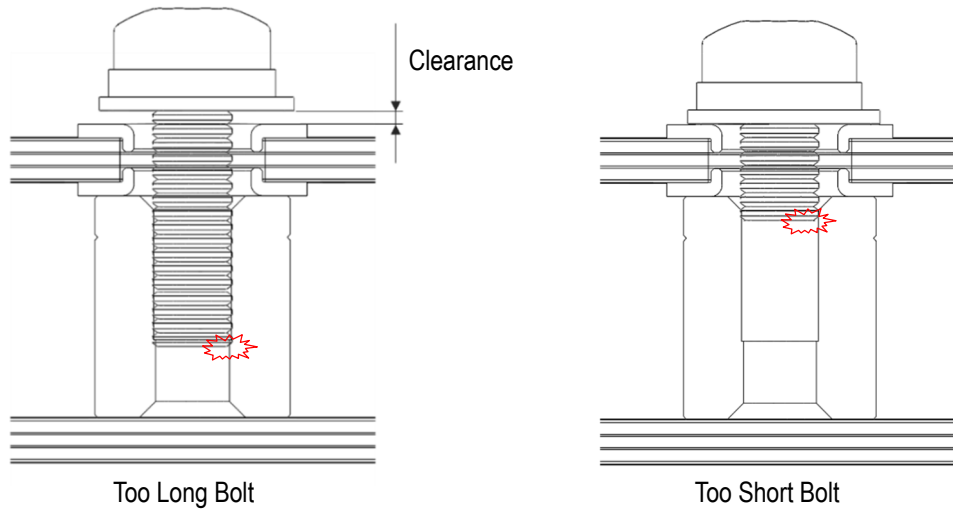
Issues Caused by Using the Unsuitable Bolt Length
